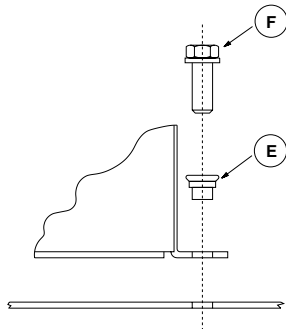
Removing Cover and Bottom Pan: VW3A66711, 712, 713, 714
